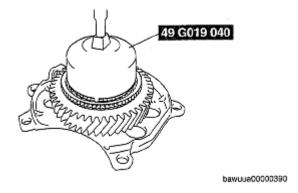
Identifying SST Courtesy of MAZDA MOTORS CORP.
